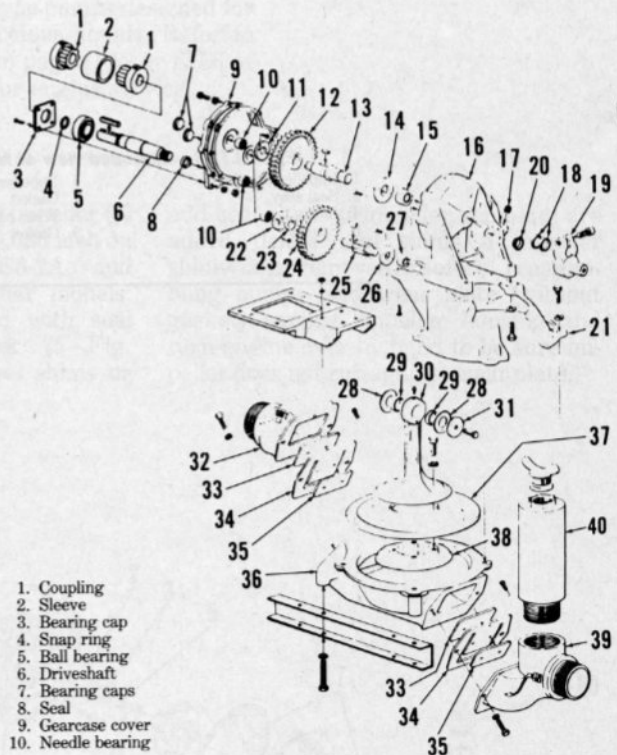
Exploded view of Model DP3-1A diaphragm pump. Model 111DP3-1 is similar.
